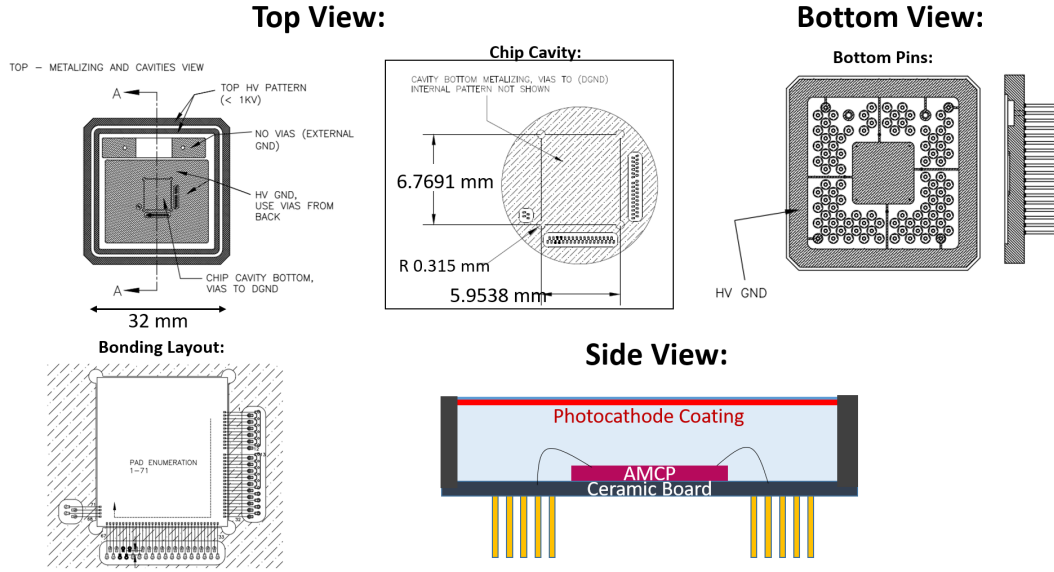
Planacon structure, showing the top view of the ceramic PCB with the cavity where the AMCP is placed, the bonding pads, the bottom view with the pins connecting to the bonding areas inside, and the side view of the whole tube.
